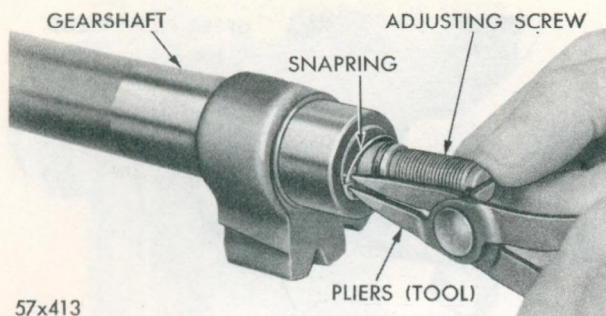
Removing or Installing Adjusting Screw Snap Ring
